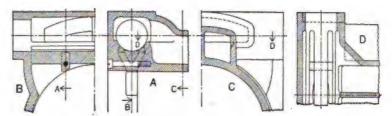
Detail of Cylinder-casting, Valve in Fig. 468 IV.
